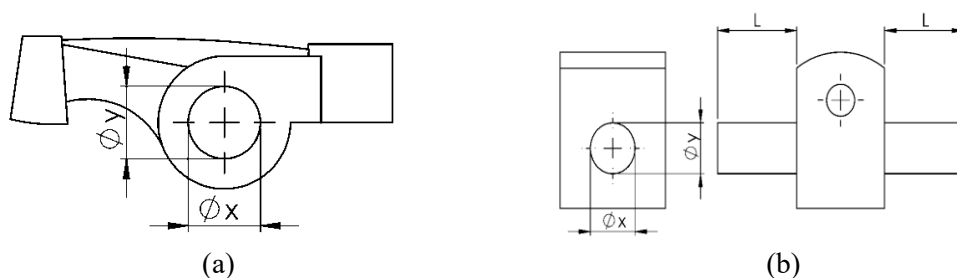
Location of component measurement (a) rocker arm and (b) rocker arm shaft
